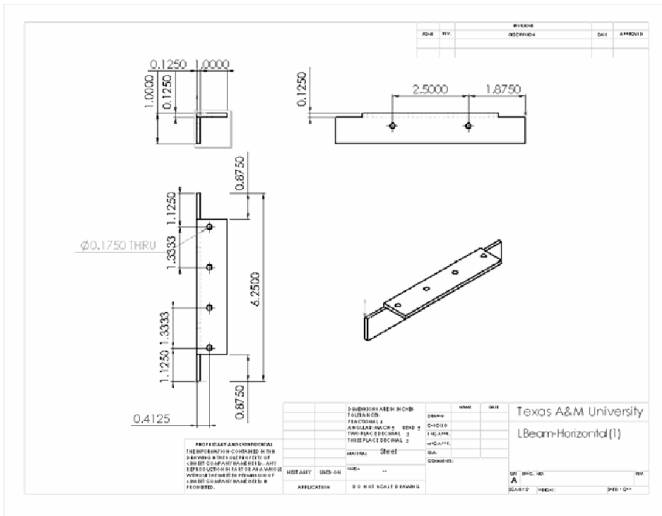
Drawing Sheets for Horizontal L-Beams.
